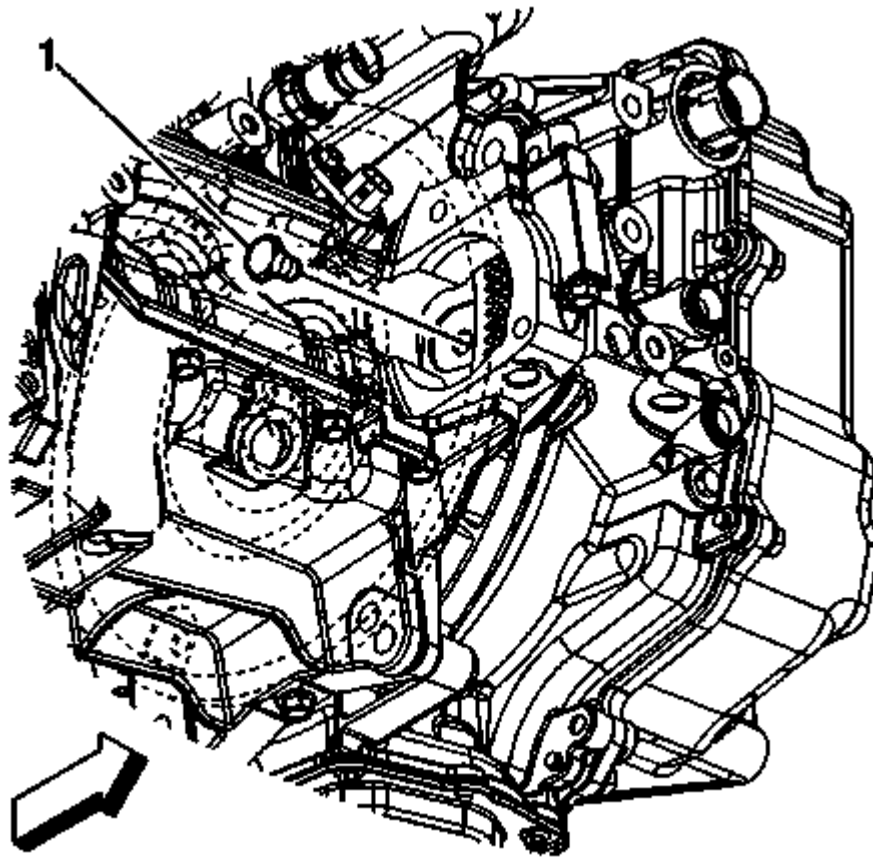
Engine Wiring Harness Ground Bolt
